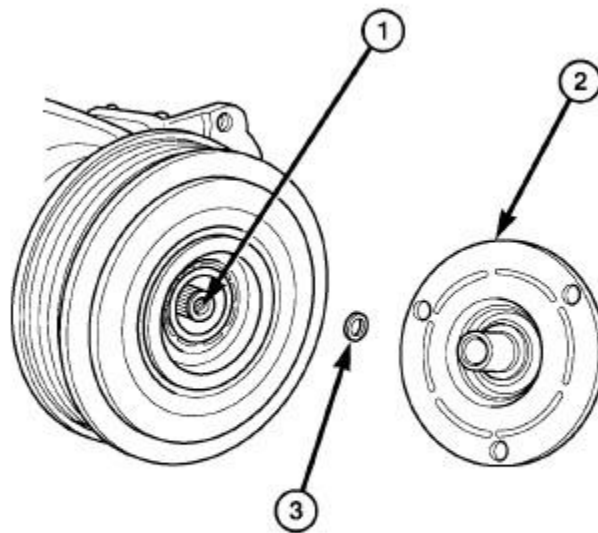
Identifying Compressor Shaft, Clutch Plate & Shim
